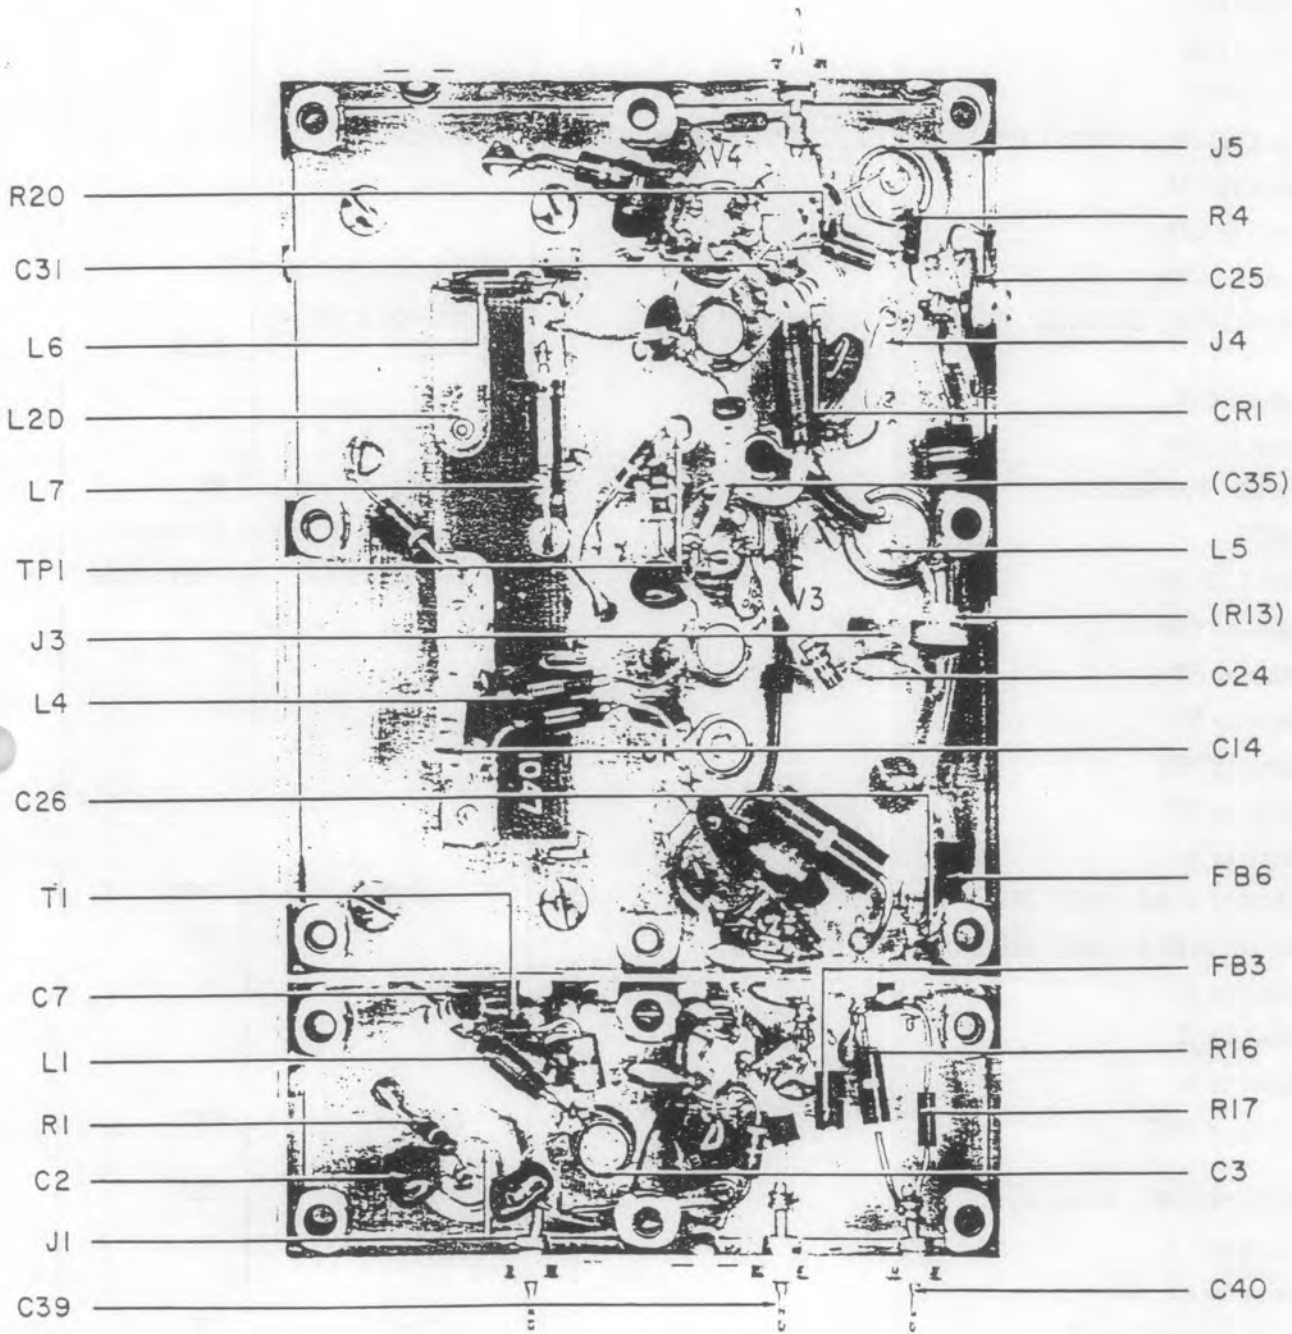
Type 7165 30-60 mc Tuner, Component Locations
